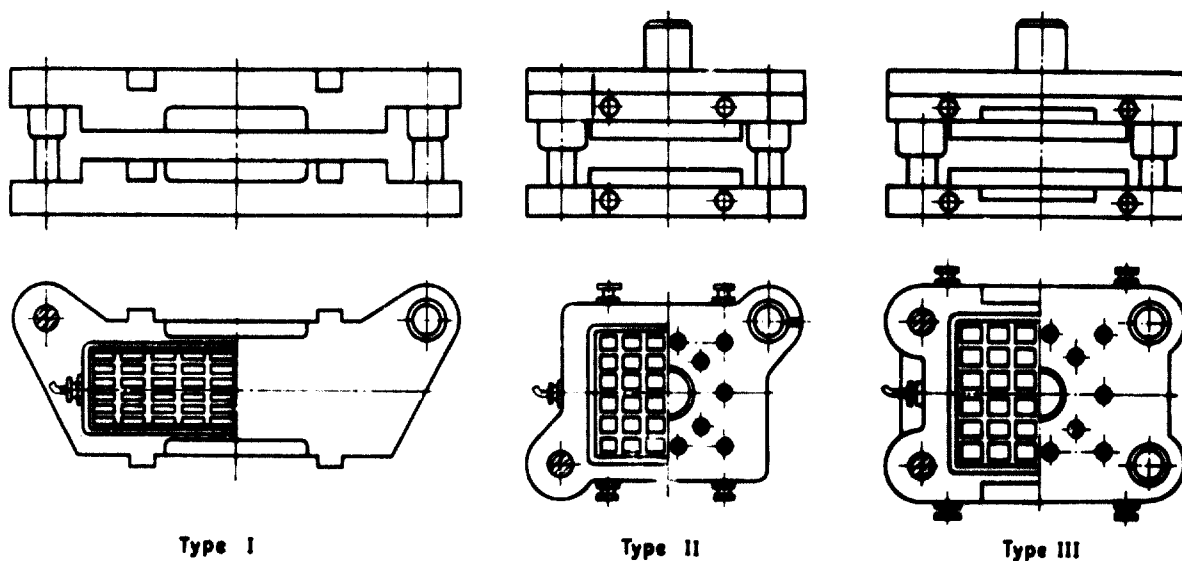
Universal blocks with electromagnetic fastening of the punch and die units
